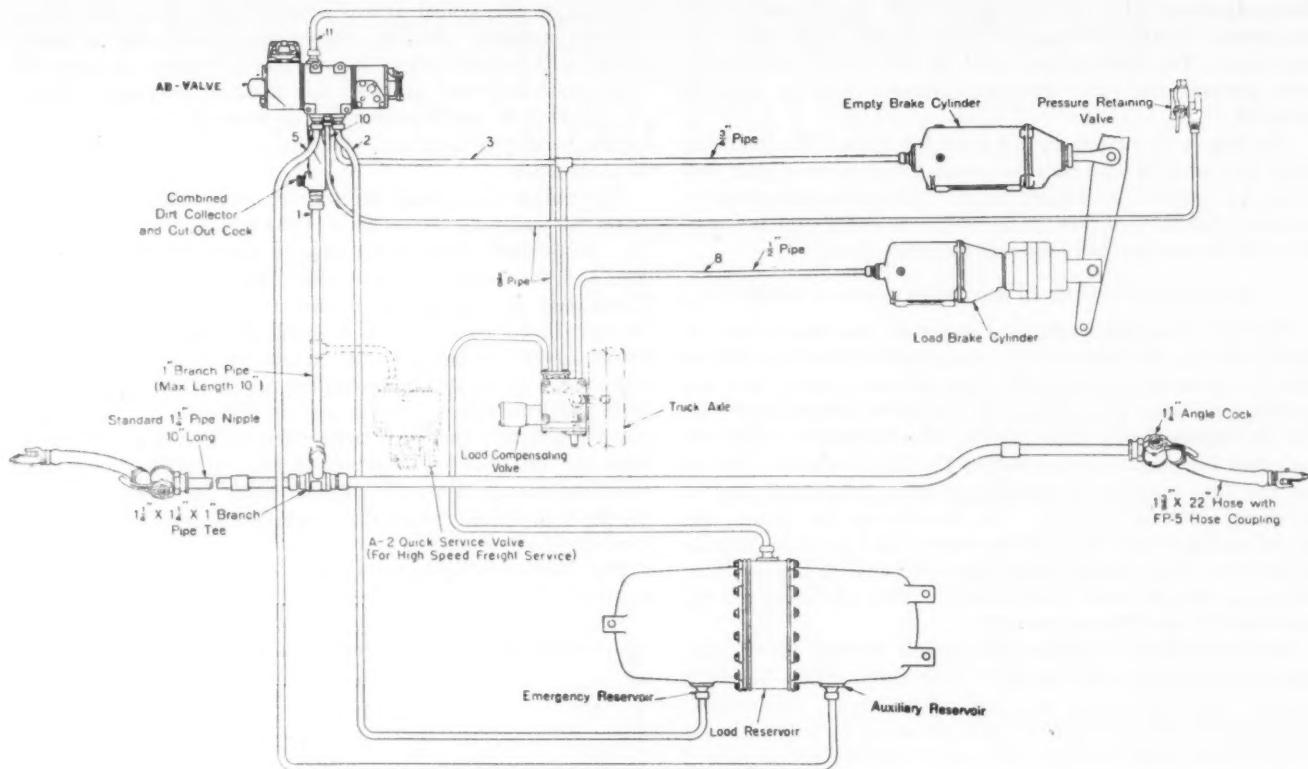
LOAD-COMPENSATING BRAKE EQUIPMENT
